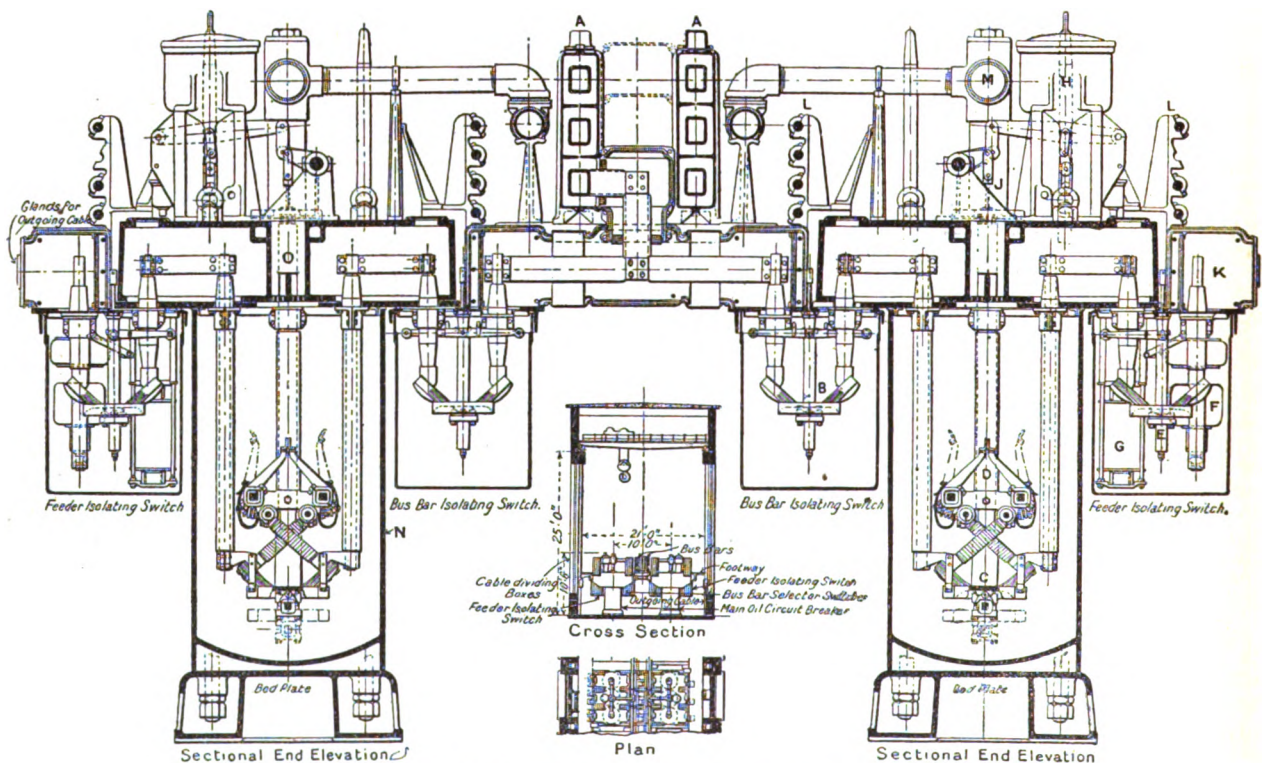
Heavy-duty metal-clad compound-filled switchgear unit.
